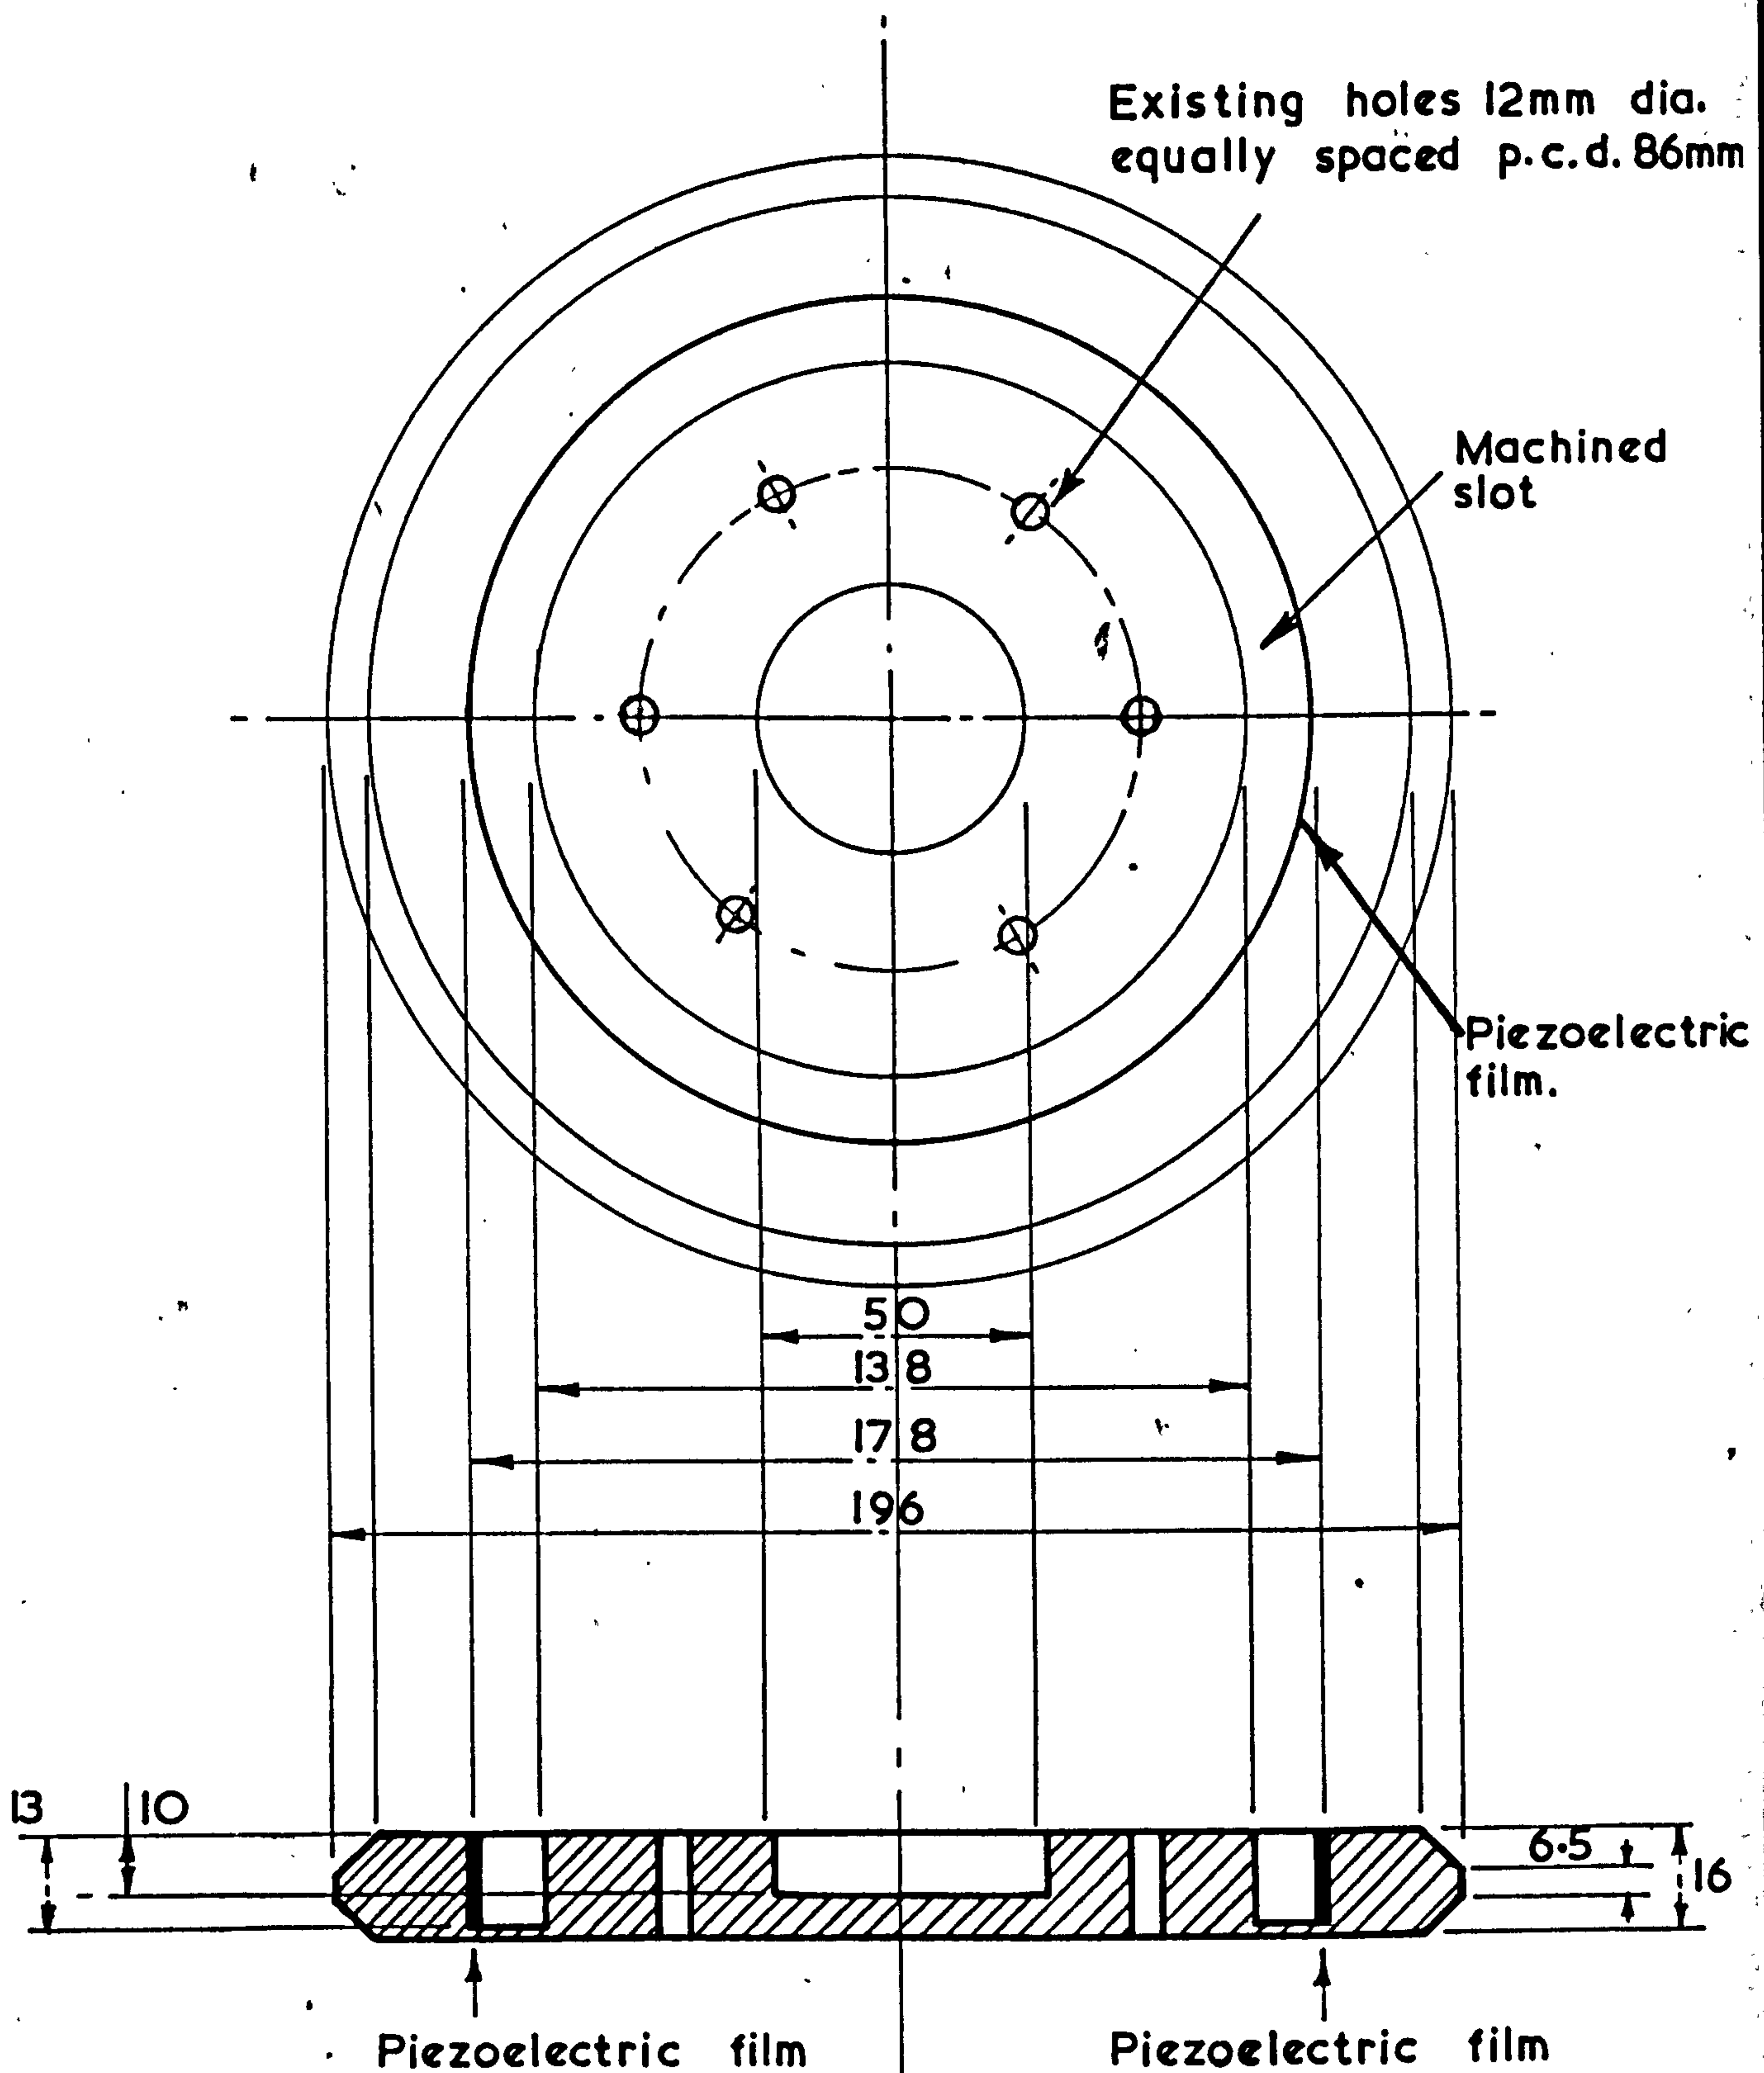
Seam welding electrode (dimensions in mm)
